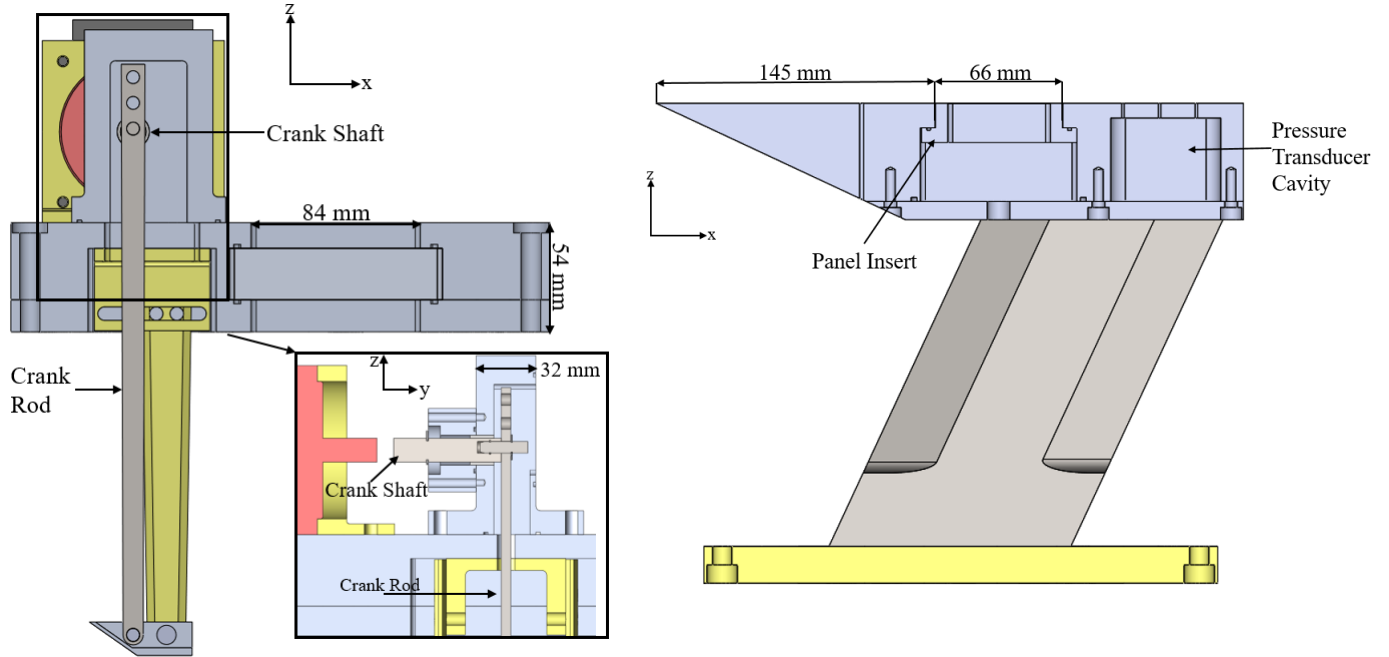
Experimental setup sub-assemblies: Oscillating wedge assembly (left). Flat plate model with compliant panel insert (right).
